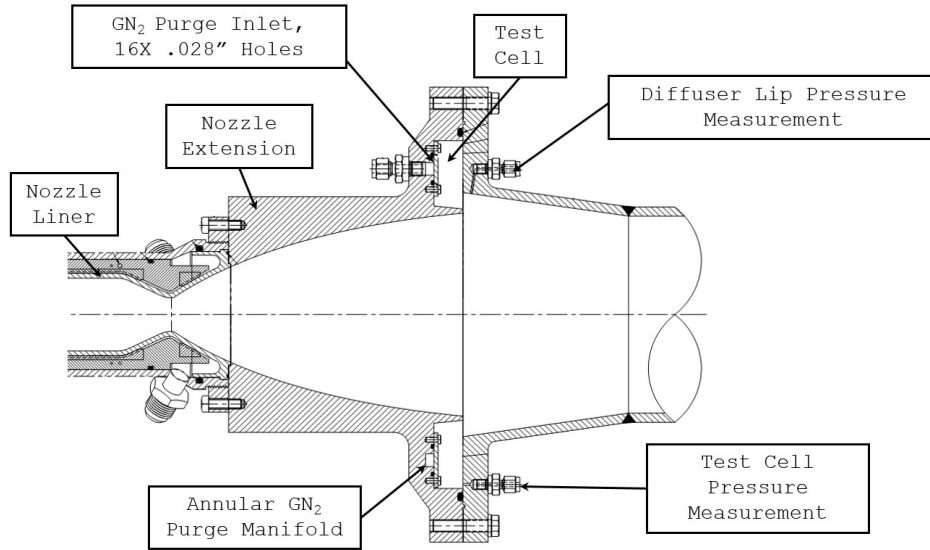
Cut-Away Detail of Nozzle, Test Cell, and Diffuser Inlet
